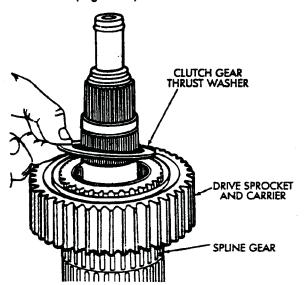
Install Drive Sprocket, Carrier And Clutch Gear Thrust Washer
